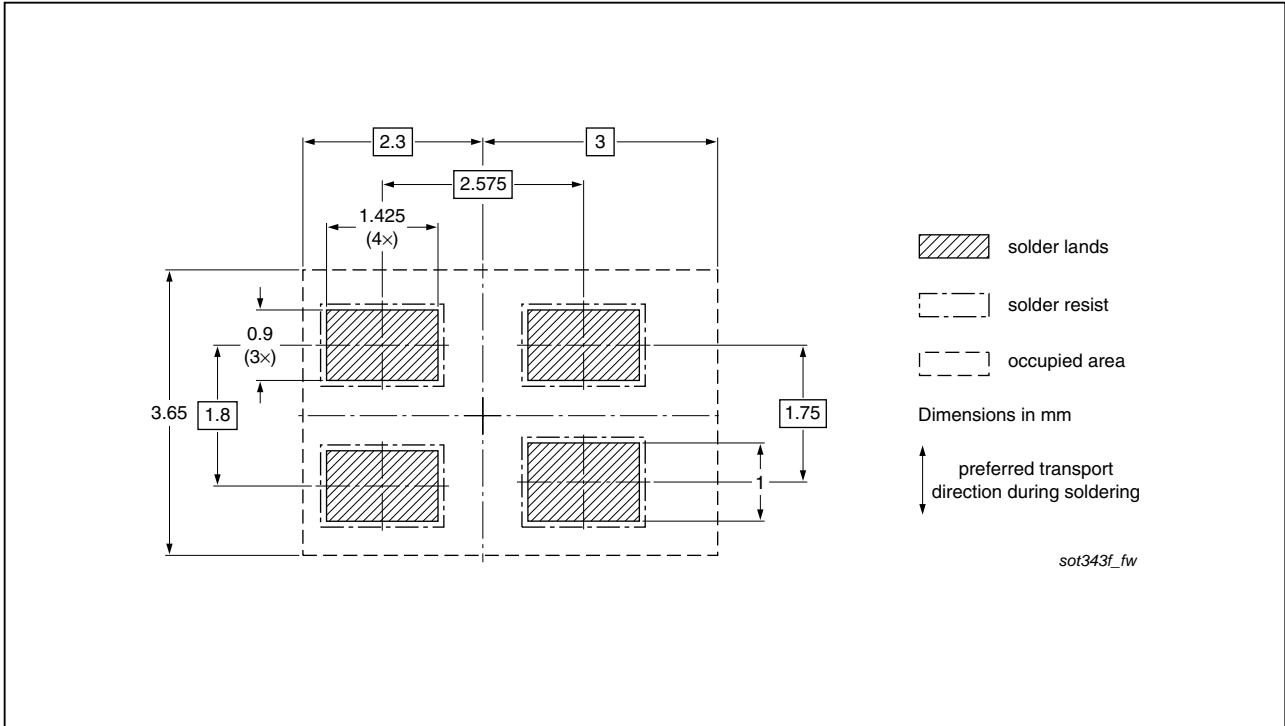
Wave soldering footprint for SOT343F (DFP4)
